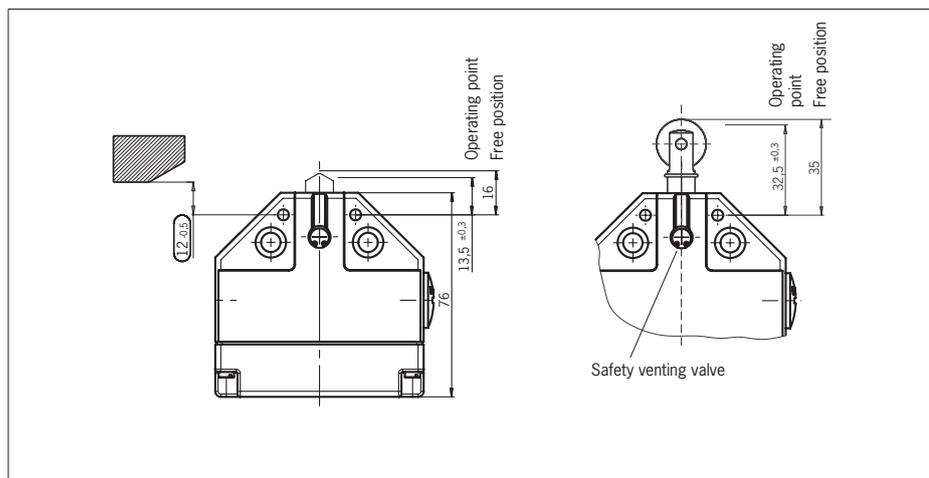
Dimension drawing of N1A.2588 (2 x ES588)
